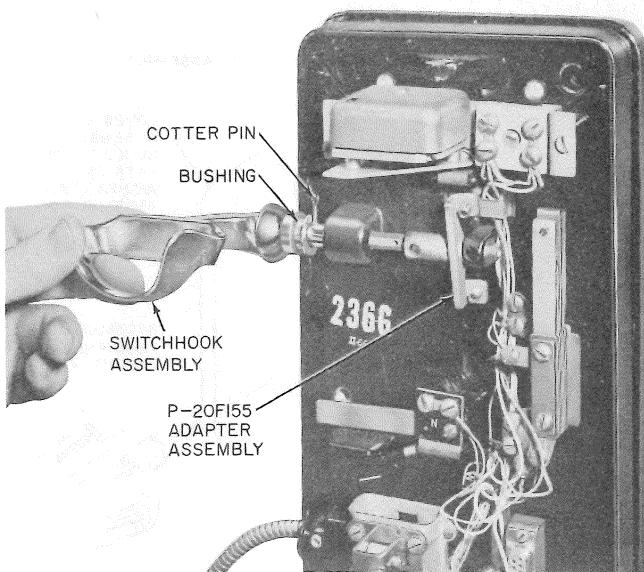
Installation of Adapter Assembly and Switchhook Assembly
